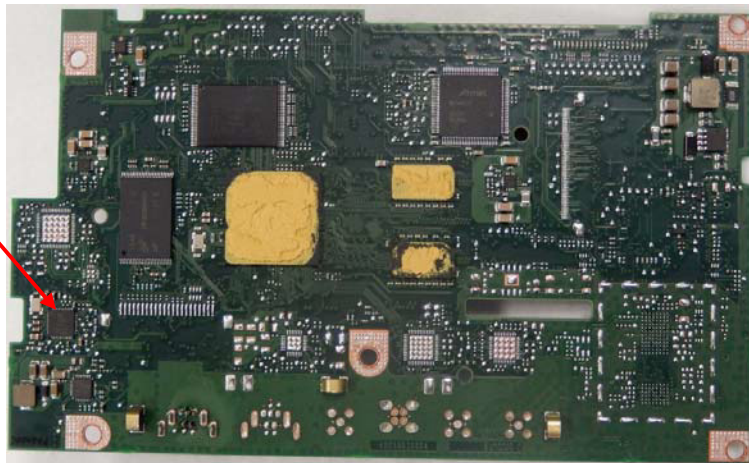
VP2 Refresh FP PowerRadio board PCB Bottom
